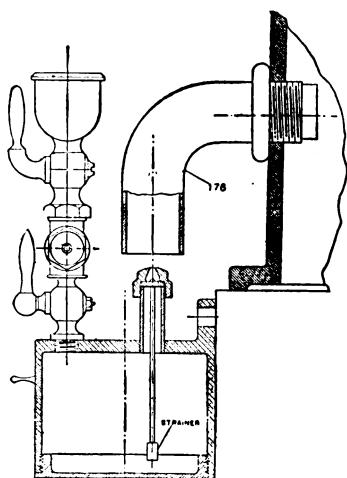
Sectional View of Starting Lamp Showing Burner and Blow-pipe.
